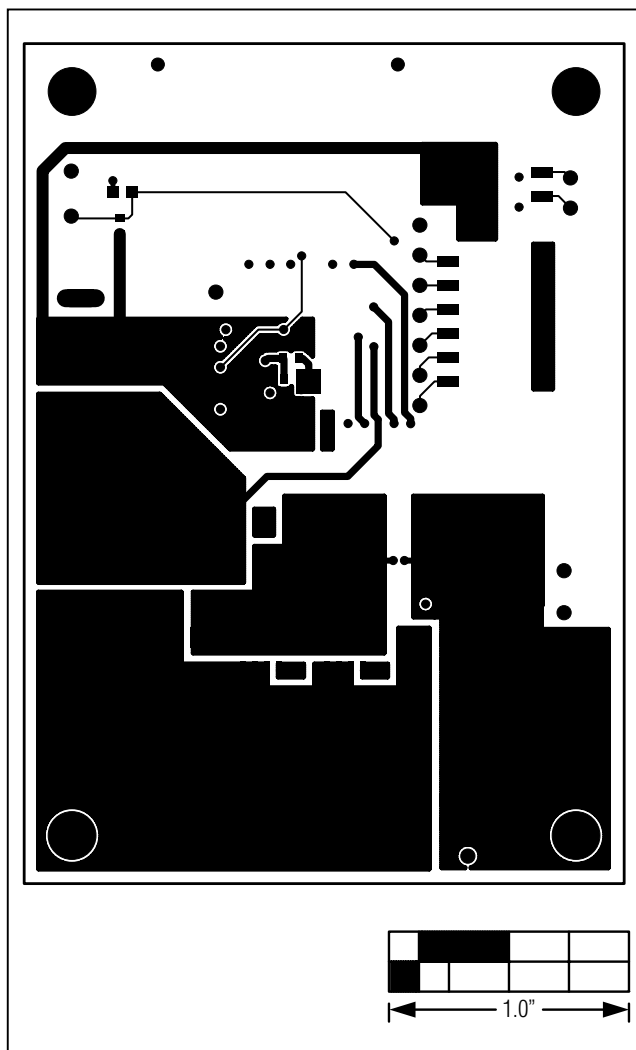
MAX17409 EV Kit PCB Layout—Component Side
